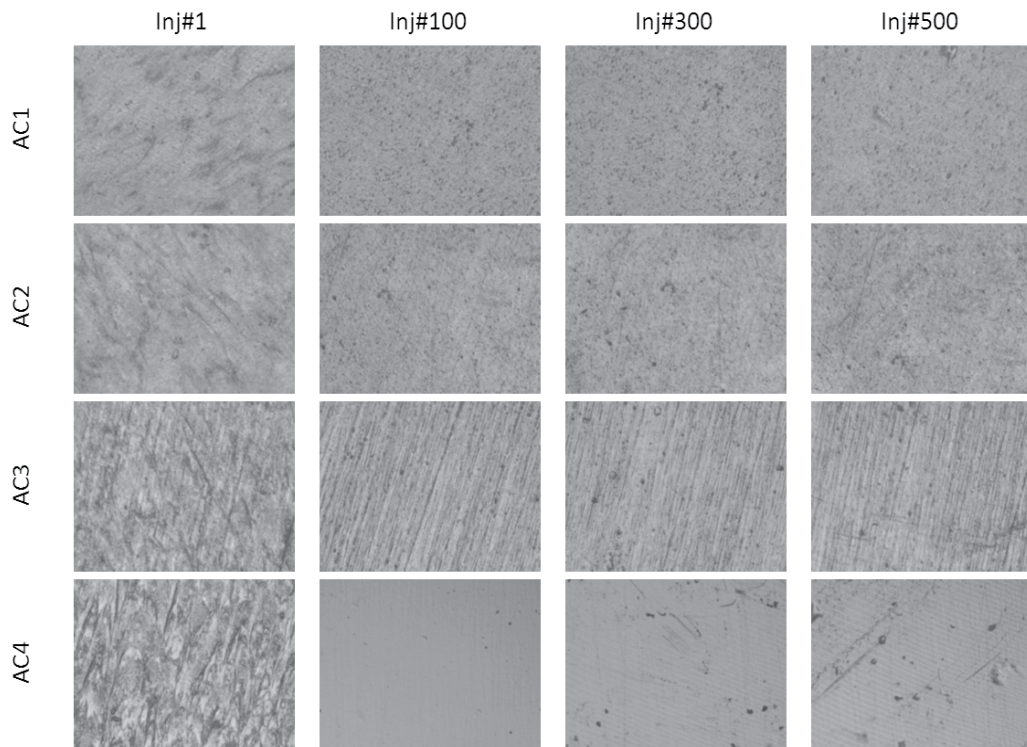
Optical microscopy images of the HDPE molded surfaces
